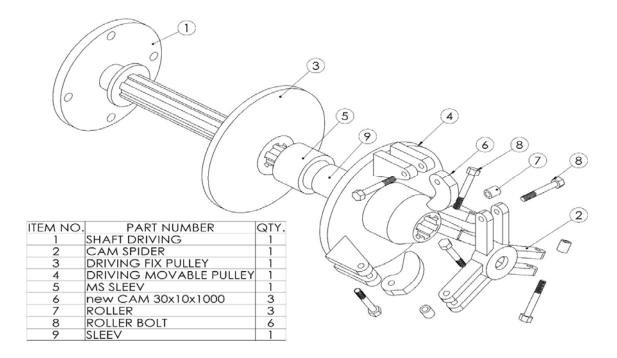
Primary Clutch – Exploded View with Bill of Material
